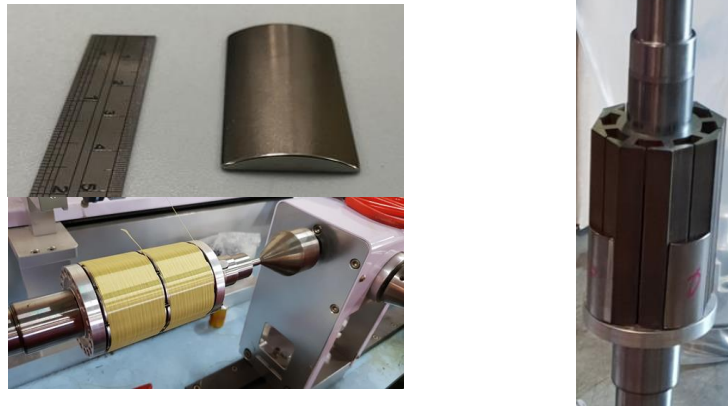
Manufactured FW-SPMSM with the symmetrical rotor
